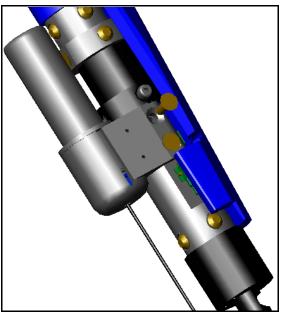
Attach the Spring Tube to the Lower Tibia Tube
